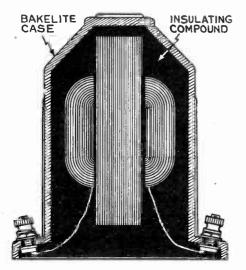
Line drawing of Pilot moisture proof transformer showing that the entire core and coil assembly is hermetically sealed in the bakelite case.
